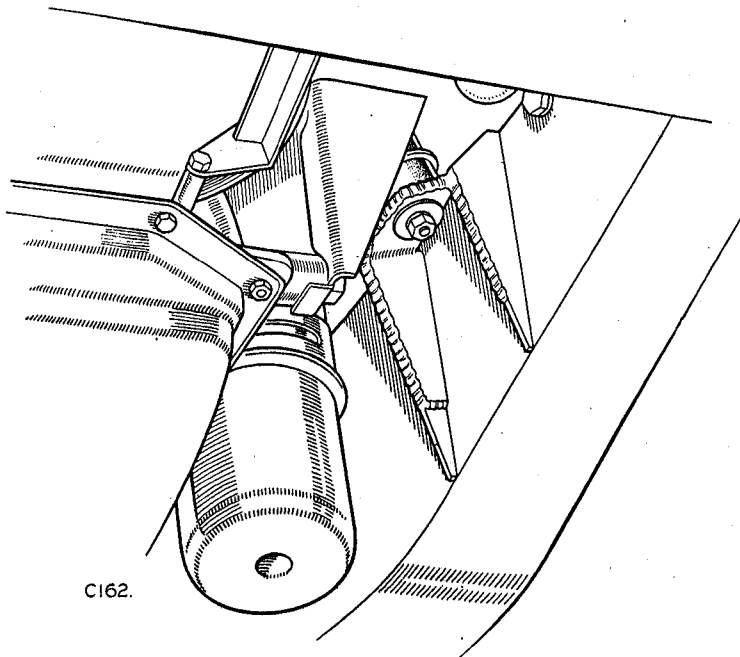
Support bracket welded in position and parts reassembled.
